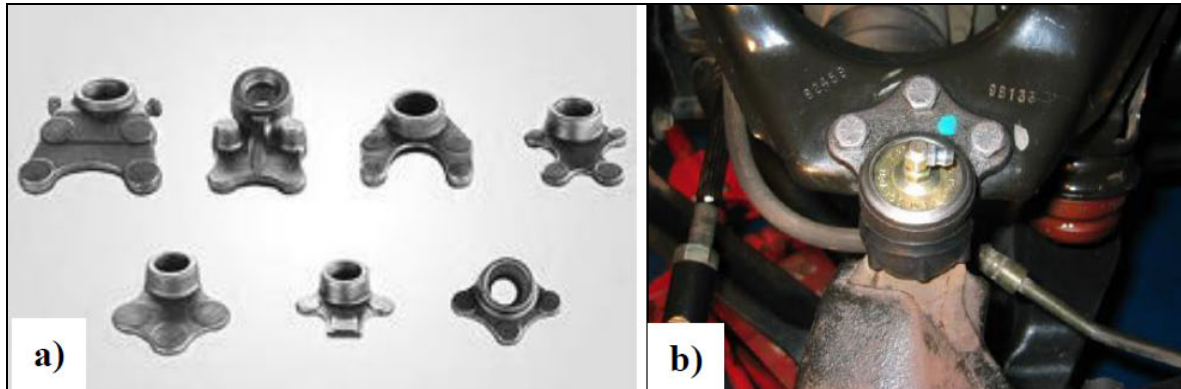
a) Ball joint parts in various forms, b) A ball joint assembly [5, 6]
